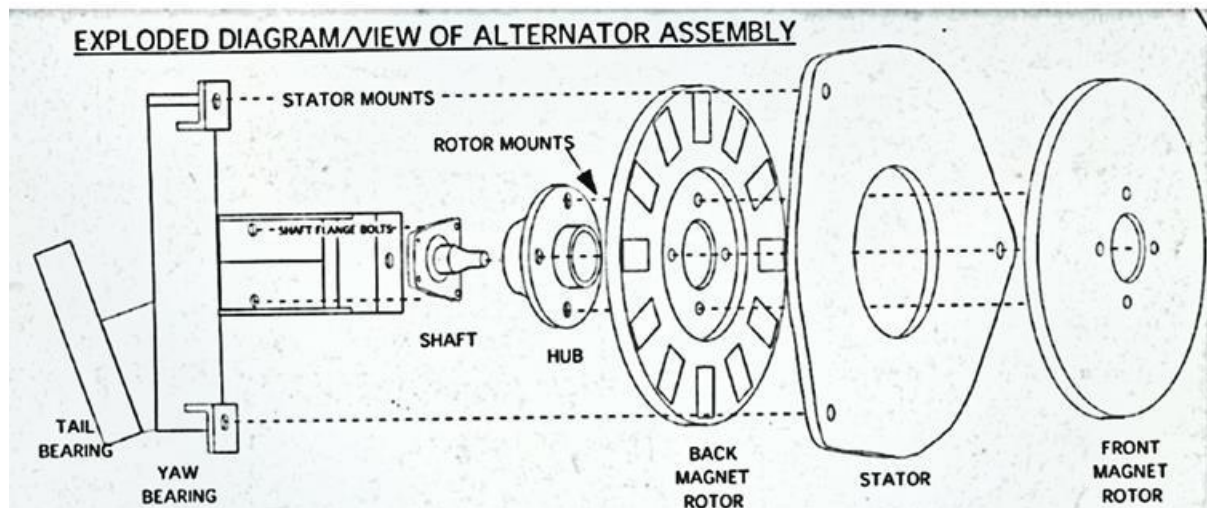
Double Sided Rotor AFPM Wind Turbine Assembly
